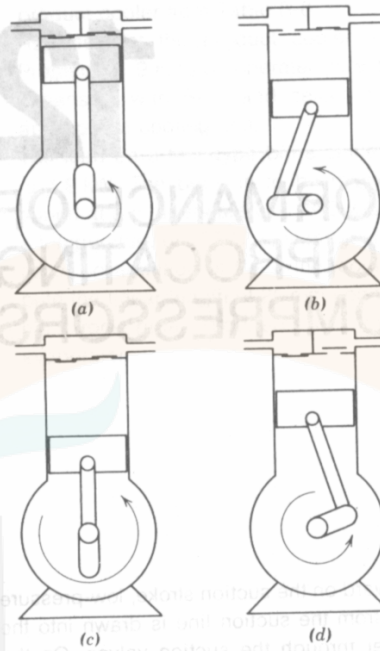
(a) Piston at top dead center. (b) Suction valves open. (c) Piston at bottom dead center. (d) Discharge valves open.
